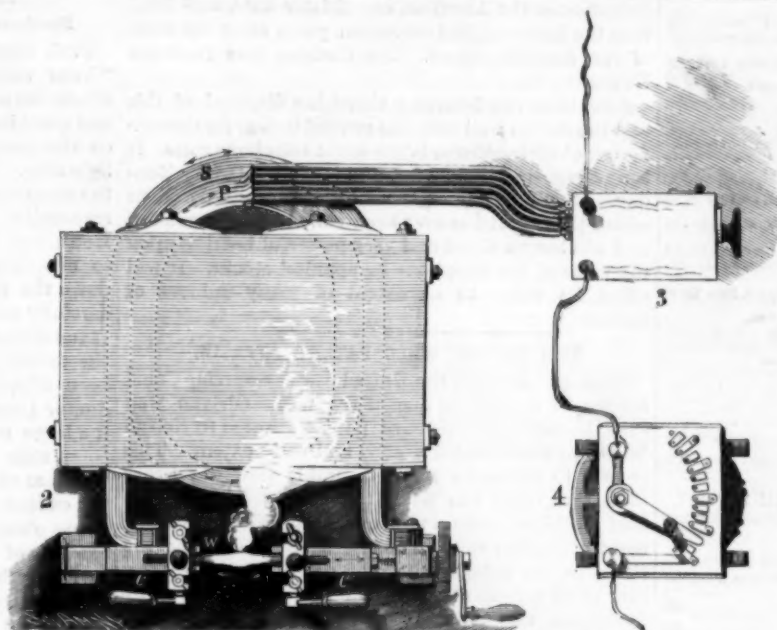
PLAN VIEW OF THE TRANSFORMER AND WELDING CLAMPS.
